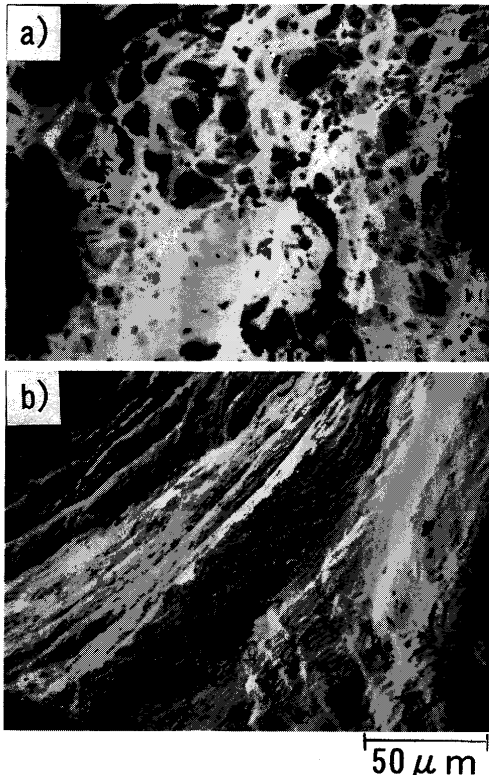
Fracture surface of specimens deformed at 973K
